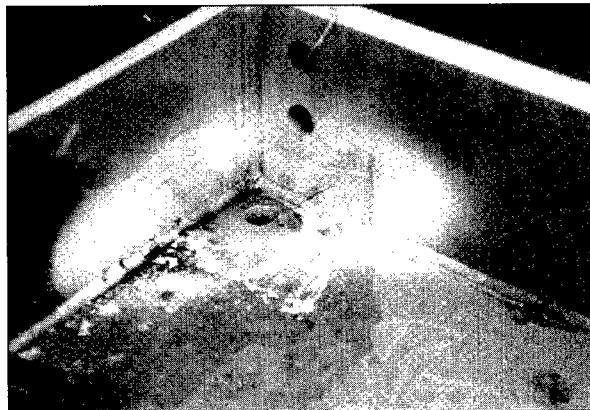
Zinc drain opening and crack propagating from the web plate to the cross-piece through the fillet weld
